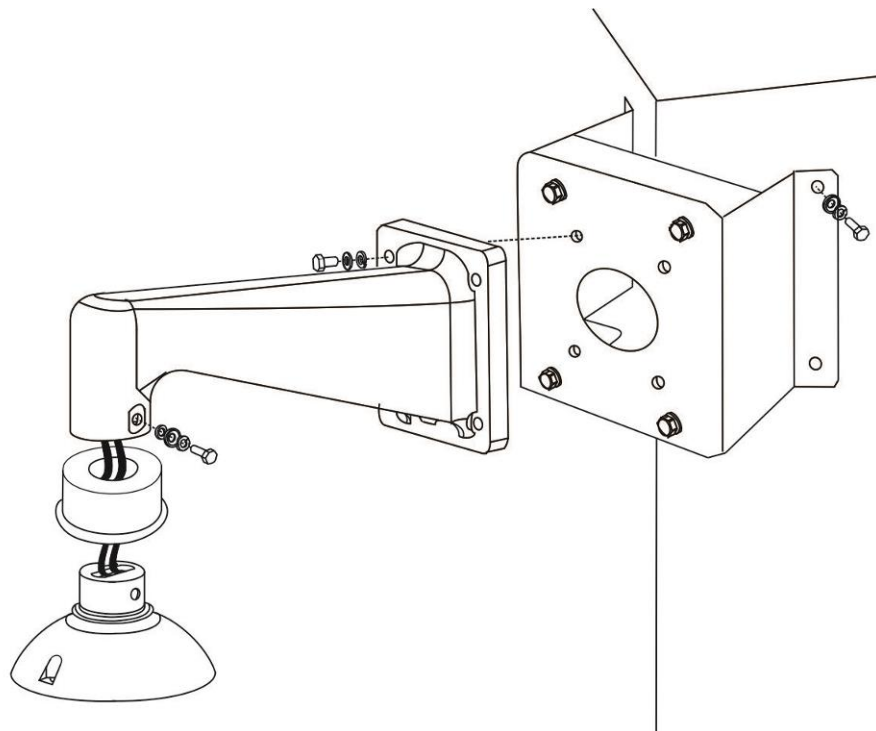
Corner Box Mounting: Corner Thin/Wide Box + Standard Wall Mount + Mount Kit
